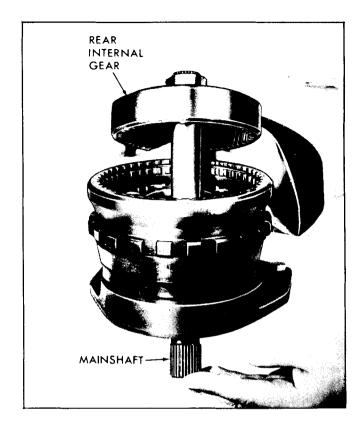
E-89 Removing Rear Internal Gear - Mainshaft
